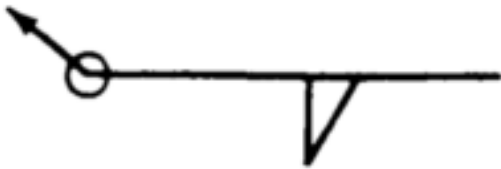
Weld-all-around and field weld symbols.
